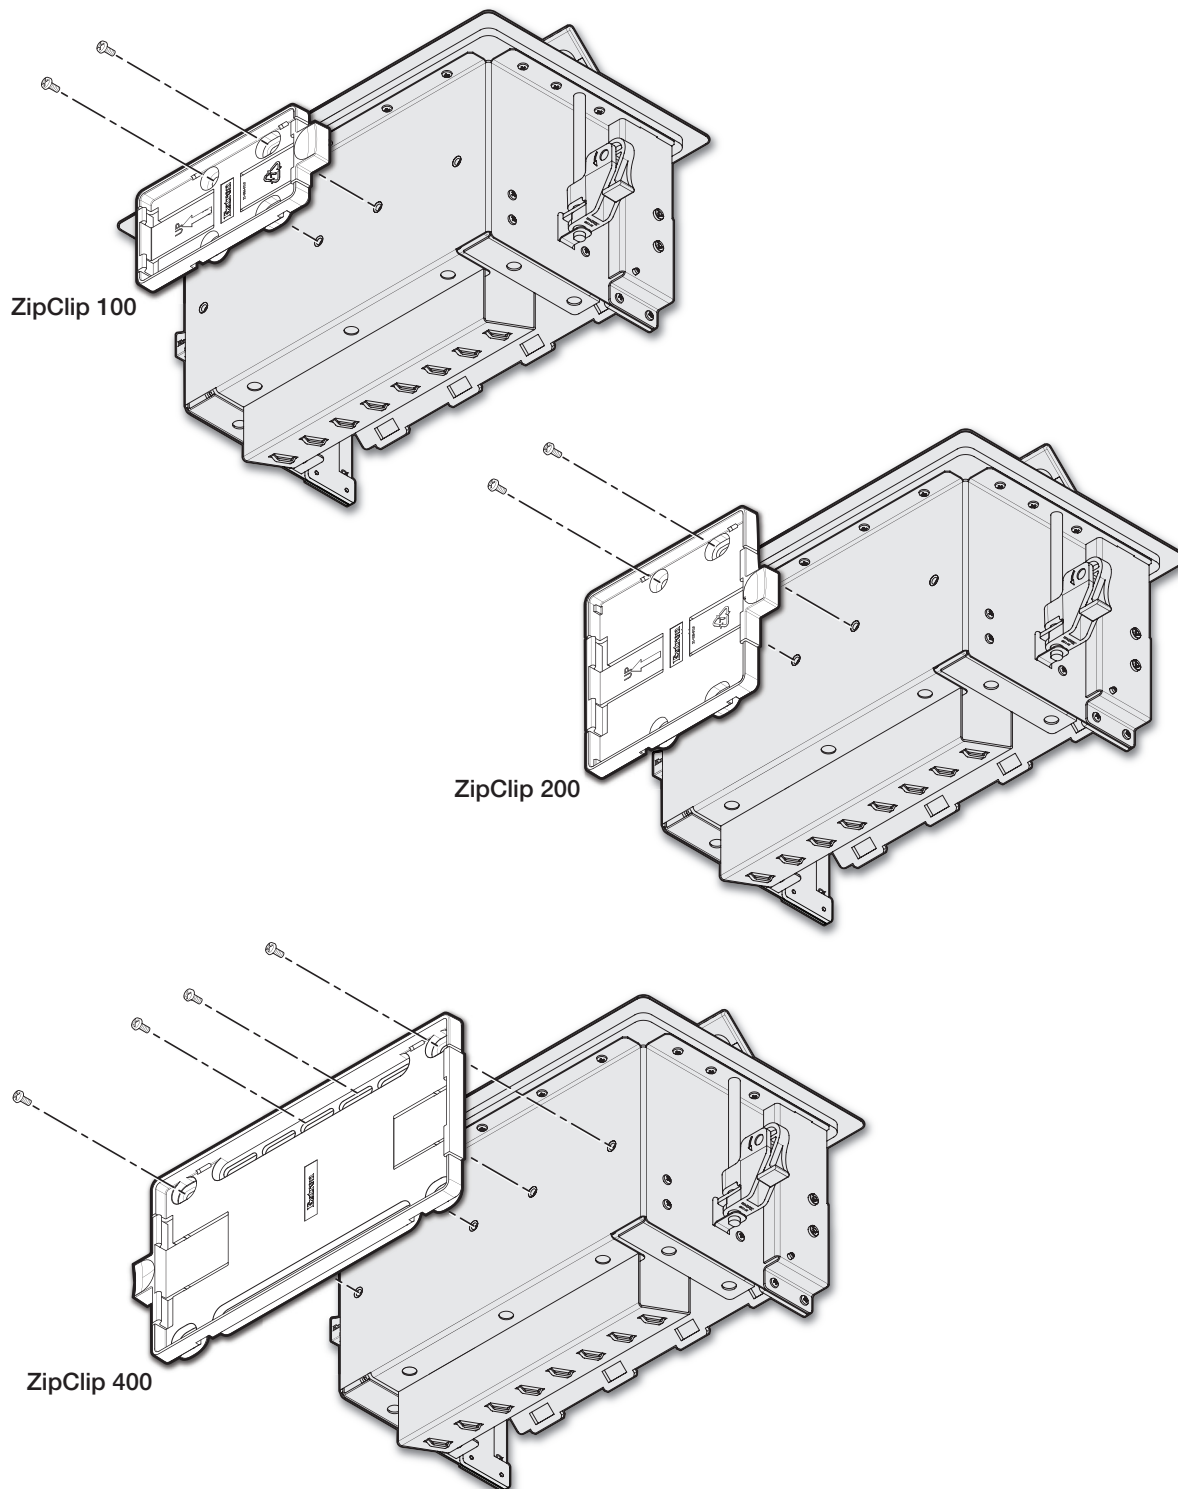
Mounting a ZipClip to the Cable Cubby F55 Enclosure
